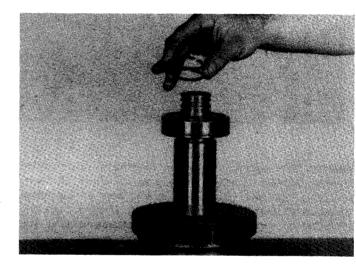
Remove clutch shaft piston rings and expander springs. See note in Figure 103.
